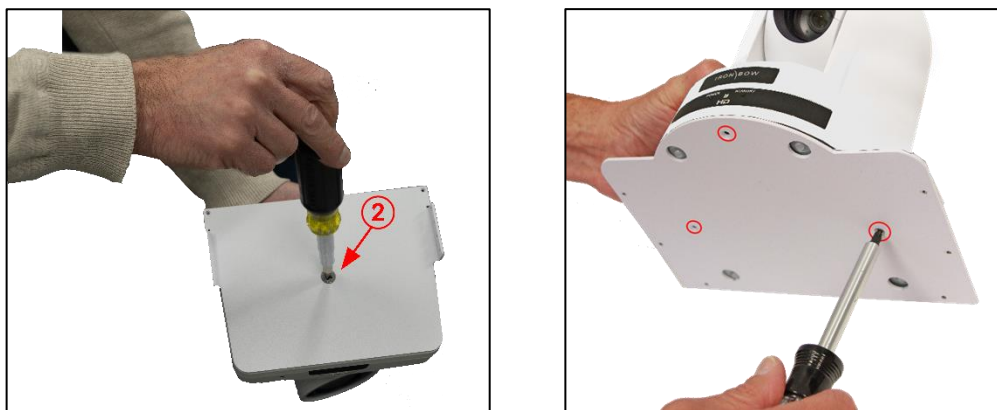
Attaching Camera to Mounting Plate (20X on left, 30X on right)
